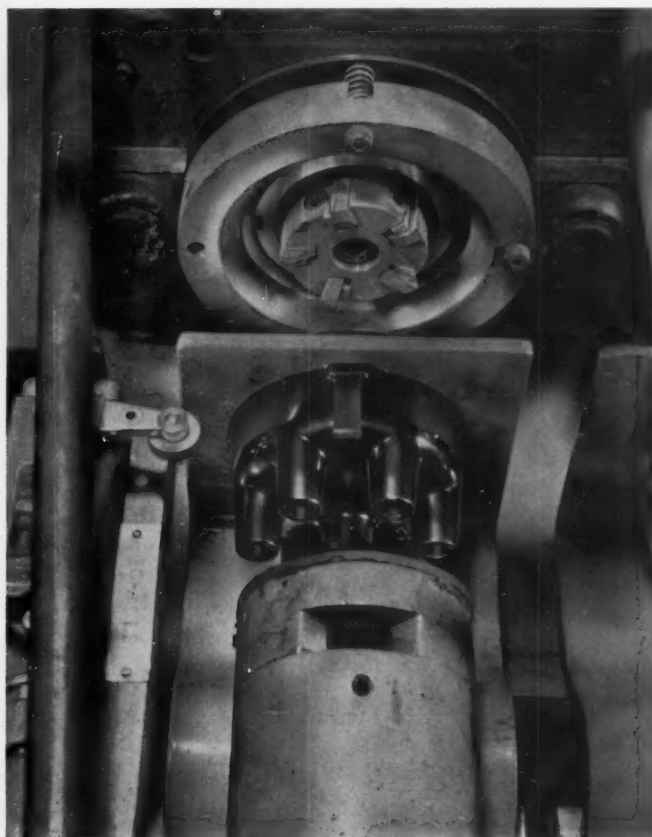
Carbon brushes stored in vibratory hopper are fed down a track and pressed into housings. A probe detects the presence of brushes in the housings.
